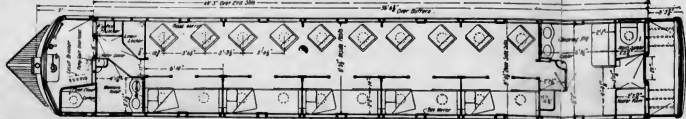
FLOOR PLAN, CONVERTIBLE SLEEPING AND PARLOR CAR.
